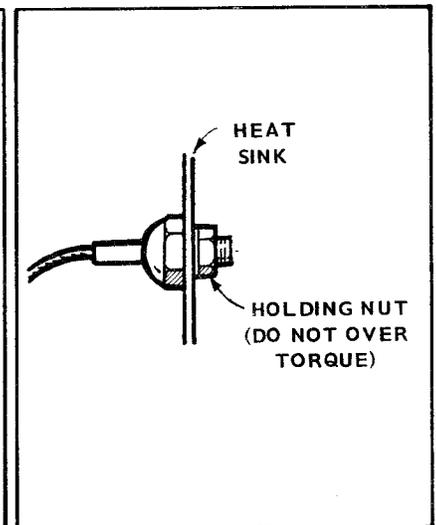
INSTALLING NEW RECTIFIERS
